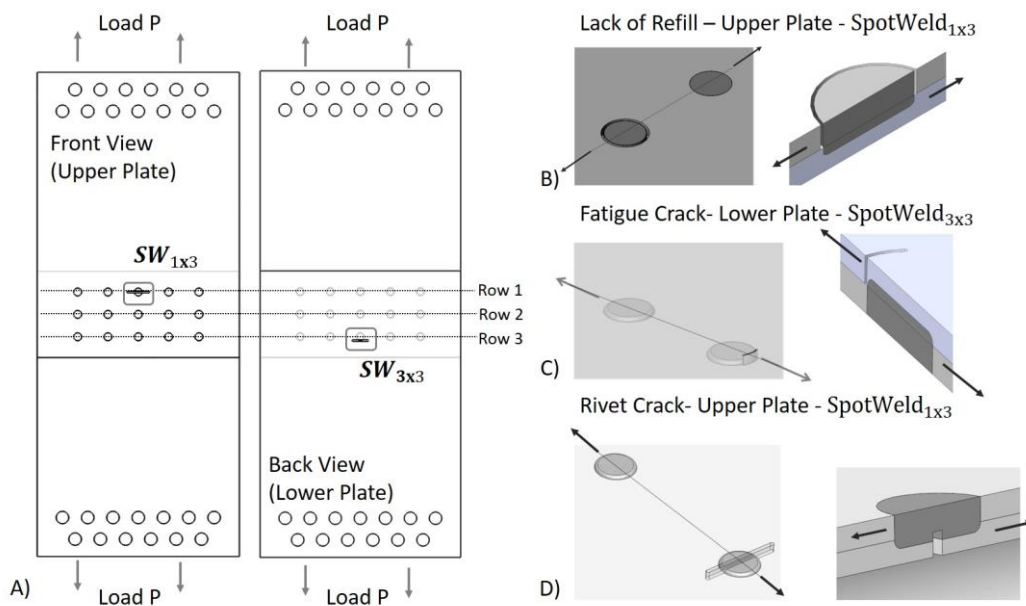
A) The locations of crack initiation; B) Lack of Refill; B) Fatigue Crack; C) Rivet Crack.
